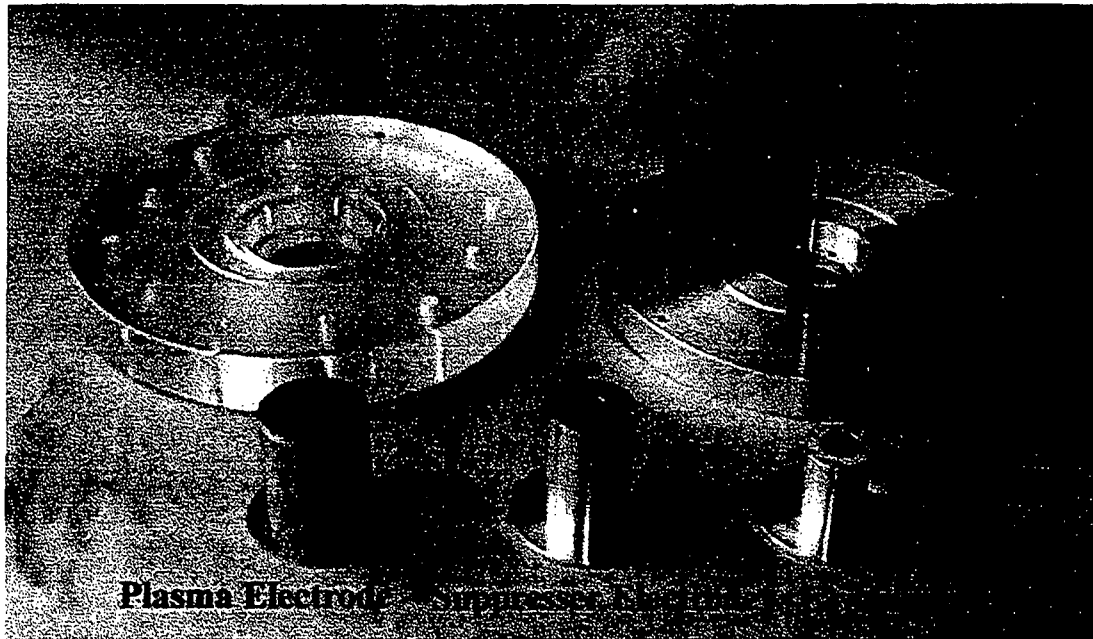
Unassembled parts of the accelerator. The aluminum flange is directly mounted to the front flange of the co-axial source. The first electrode is placed 5 cm into the source.
